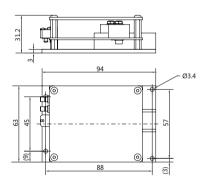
Outline drawing of DPD series drivers with conductive pad
